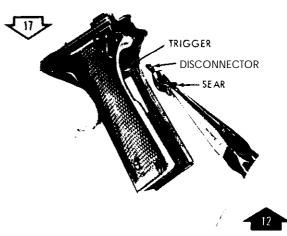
Disassembly/assembly of receiver group (4 of 7).
